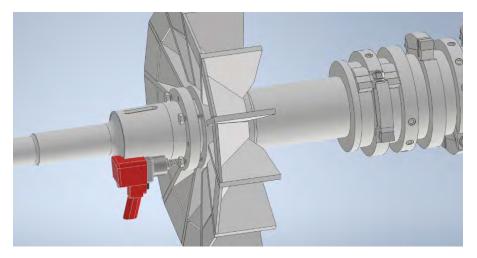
Tightening Bolts to Remove Fanwheel (BH)
